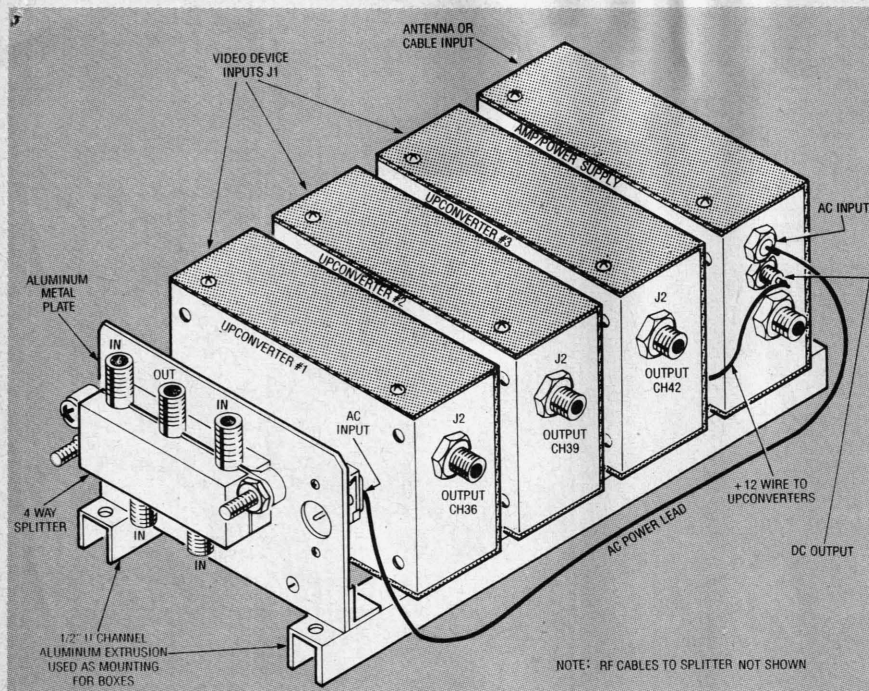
ALL OF THE MODULES for the prototype Video Master are mounted together on a pair of aluminum rails, with everything feeding into a 4-way splitter mounted on one end of the assembly.
